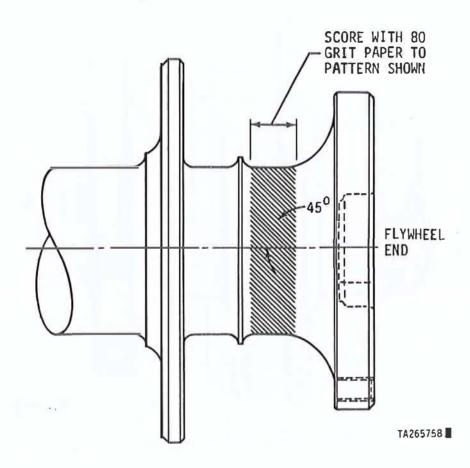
Rear oil seal wear surface on flywheel end of crankshaft.
